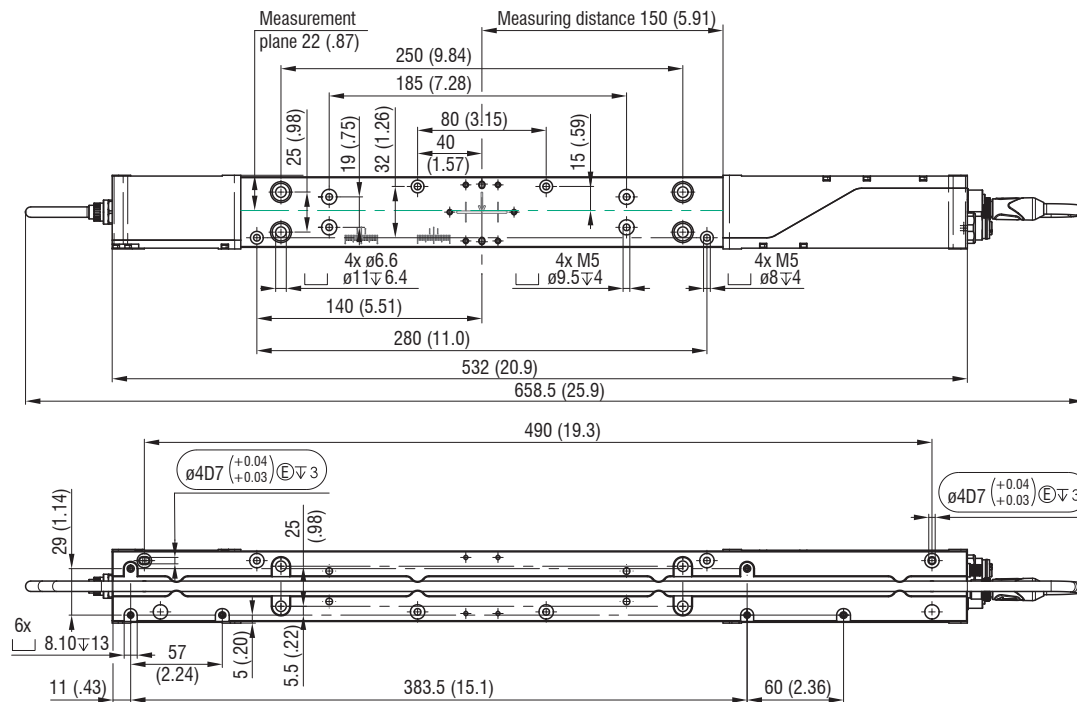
Dimensional Drawing of Light Source and Receiver with Mounting Rail, Dimensions Stated in mm
